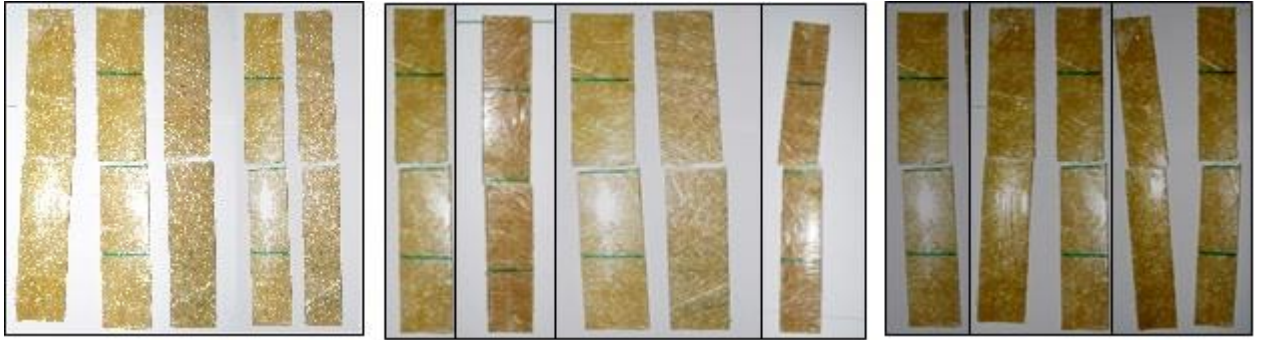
Fracture surfaces of 1, 2 and 3 ply flat FRPs.
